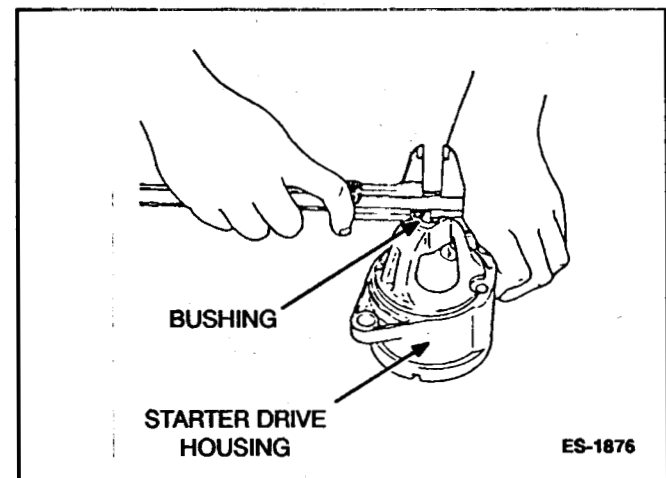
MEASURING STARTER DRIVE HOUSING INSIDE DIAMETER
